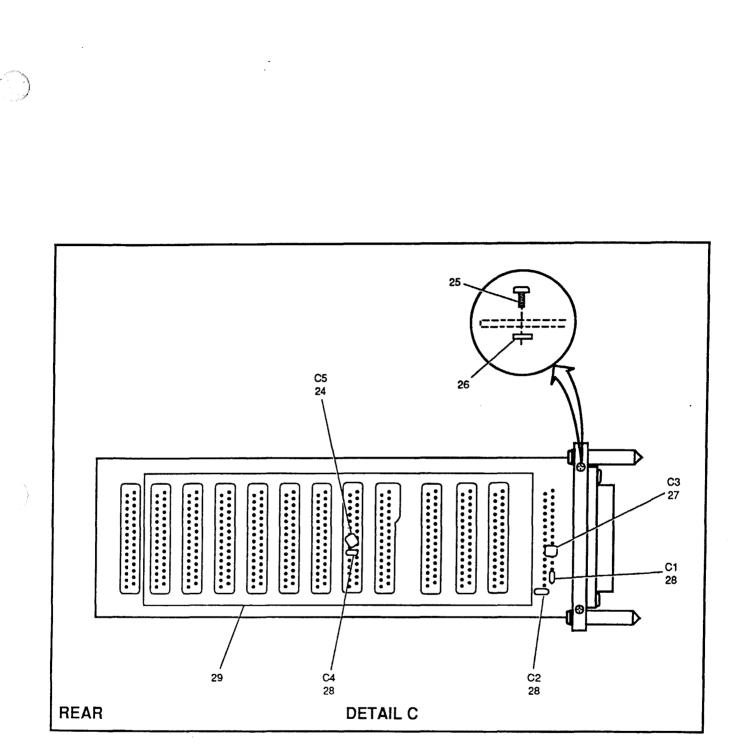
A14 Interconnect Board Assembly (Sheet 3 of 3)
